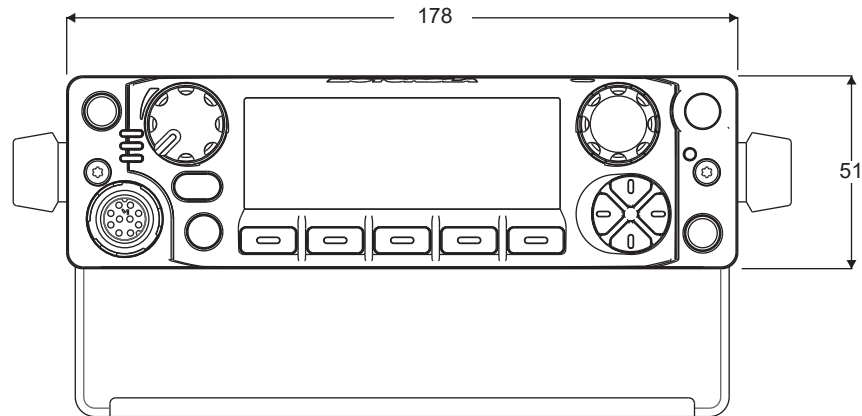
Side View of E5 Control Head with Remote Mount and Trunnion
